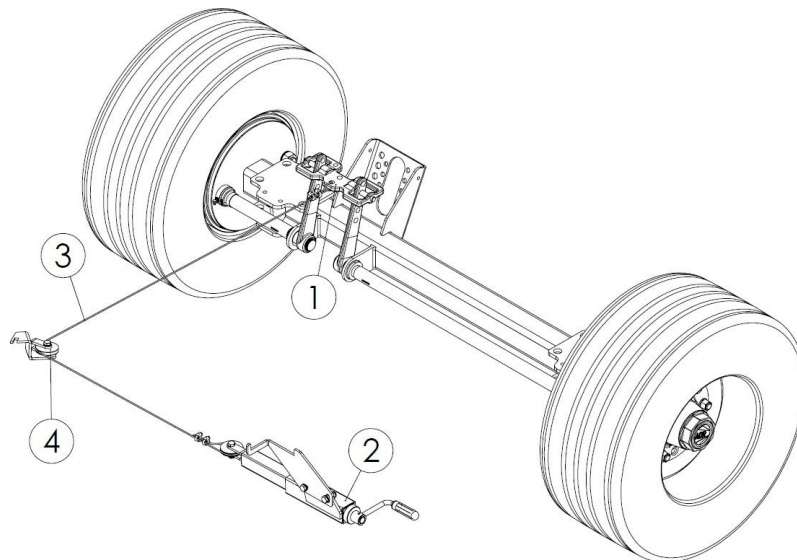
Design of the Optimal wagon parking brake: 1 - axle spreader fixture, 2 - brake tensioning element, 3 - cable, 4 - cable guide wheel
